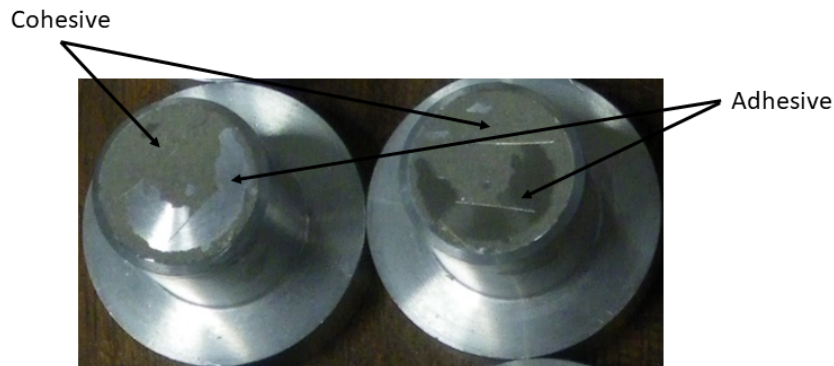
Example of mixed (adhesive and cohesive) fracture of the 3M 2216 interface without using the primer after acetone cleaning.
